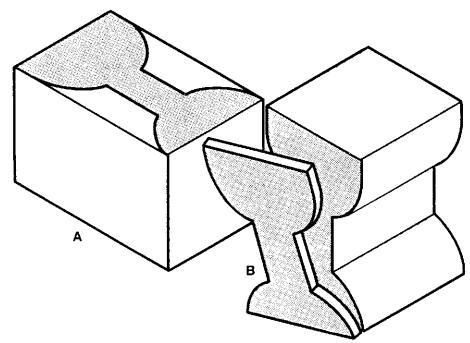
To resaw duplicates: (A) Draw the pattern on a thick piece of stock. (B) Cut out the shape and then resaw it to make the duplicates.
